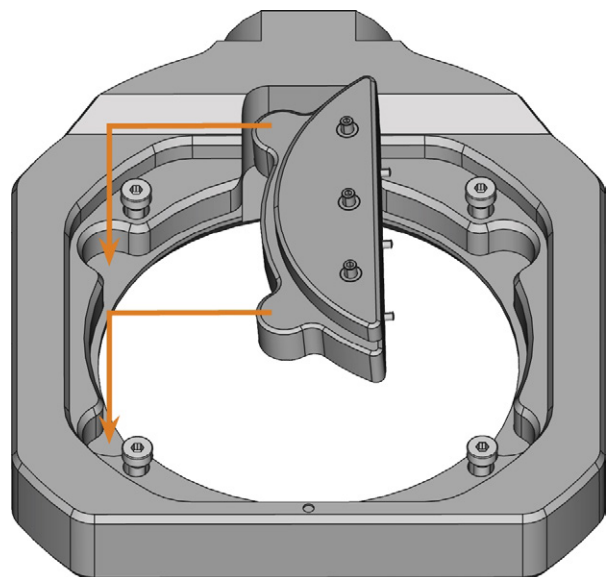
INSERTING THE BLOCK HOLDER INTO THE BLANK HOLDER
